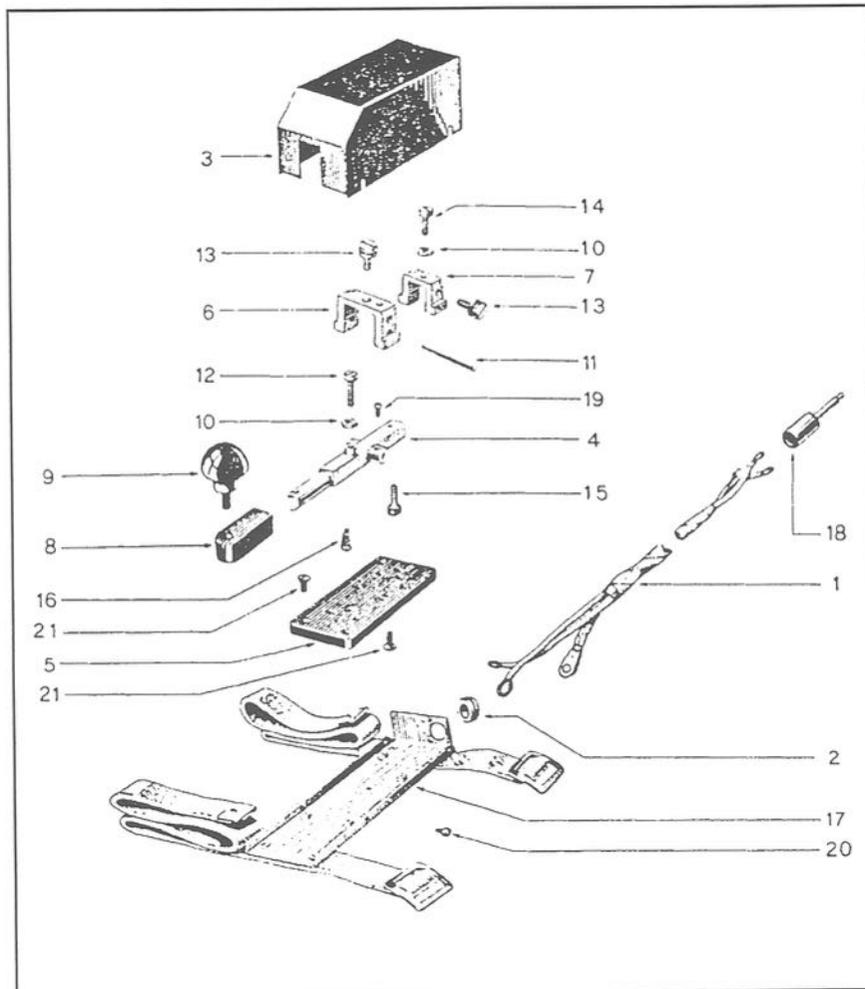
Key and Plug Assemblies, CDN, No. 9. Type 1 (ZA/CAN 1643),
